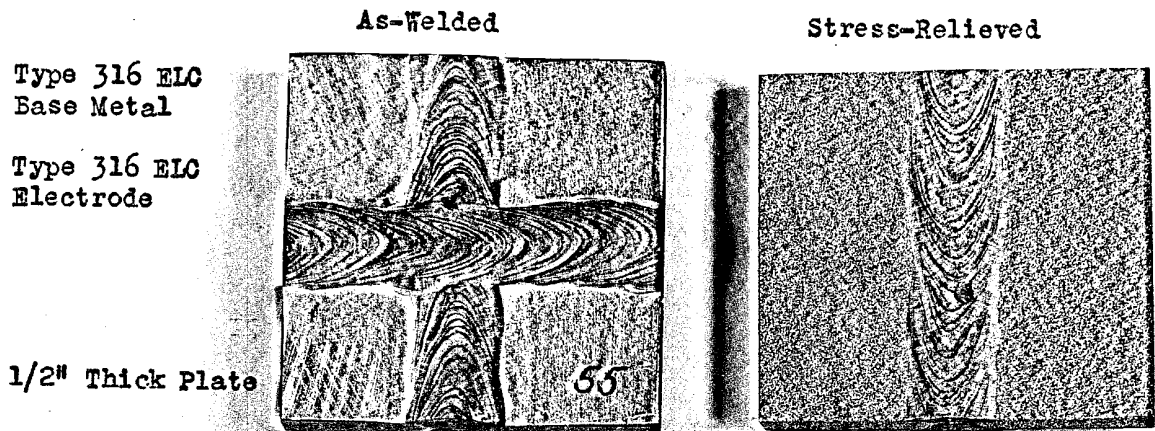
Appearance of Nitric-Hydrofluoric Acid Etch Test Specimens. Type 316 ELC Base Metal Welded with Type 316 ELC Electrodes. Full Size.
